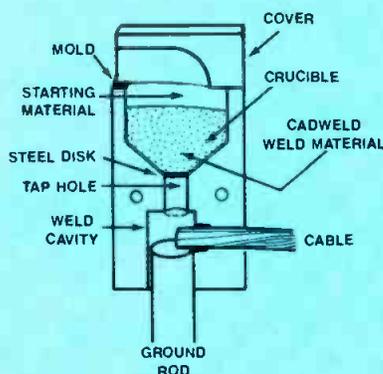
The Cadweld welding process ignites metal powders in a graphite crucible to meld metals with a molecular bond. User applies spark with flint lighter.
